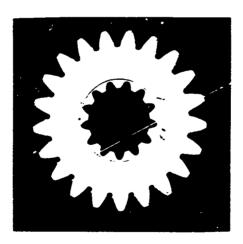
Final optimum plated gear. (0.018-in. min plate thickness)
